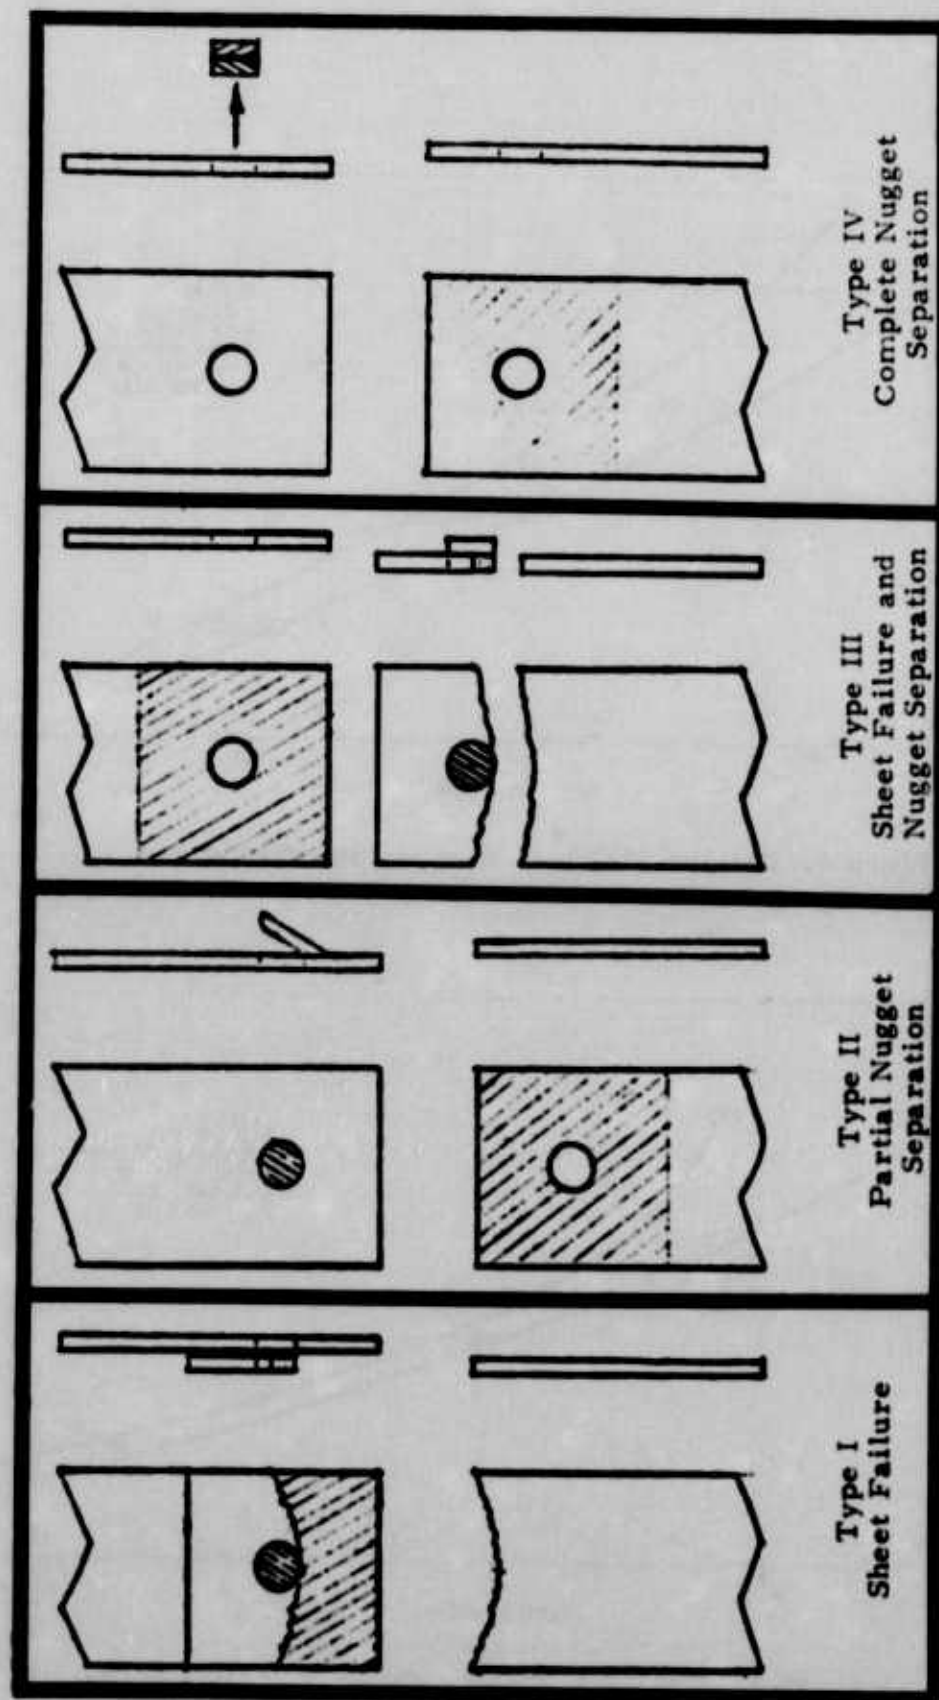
Failure modes observed on weldbonded titanium lap shear fatigue specimens.
